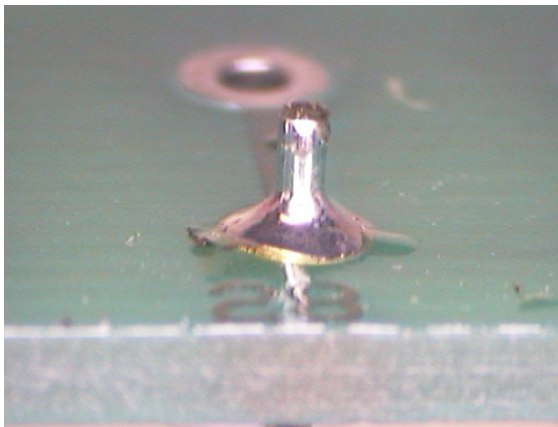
Example of a successful solder joint, seen from the soldered fillet of the circuit board (Eutectic flux cored solder, joint F28).
